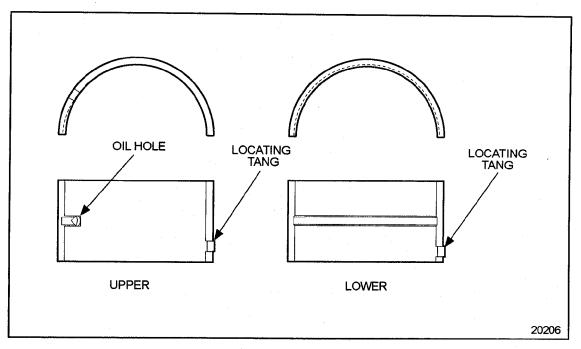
Connecting Rod Bearing Detail (Open-End Rod)
